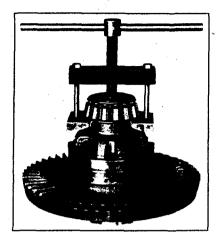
Removing Gear Mount Bearing with Puller 83230
